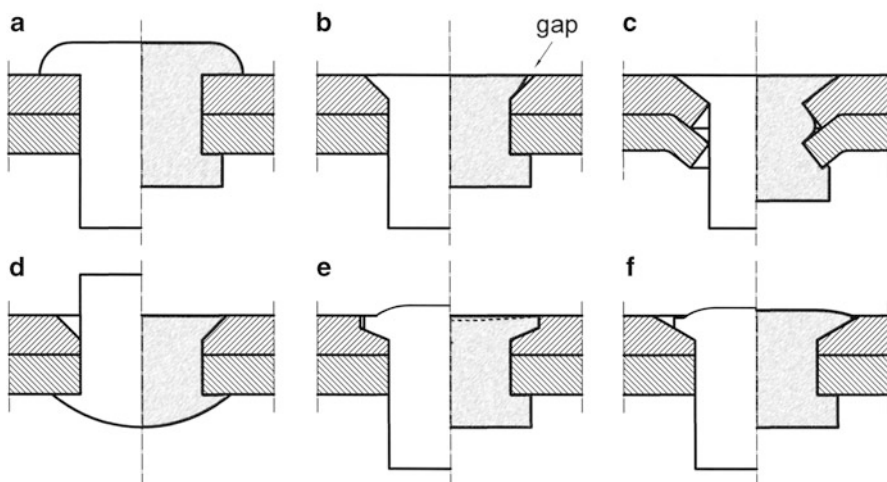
Most frequently used types of solid rivets, explanation in text. *Left side* – before riveting, *right side* – after riveting
